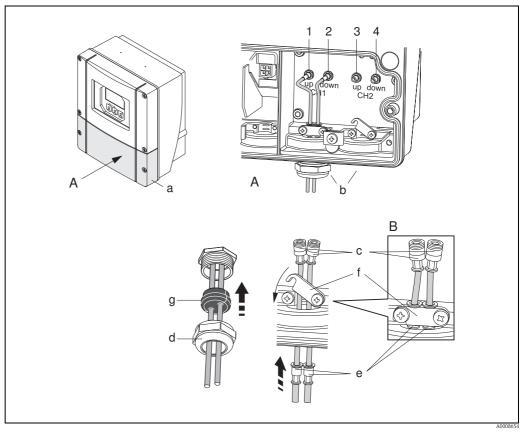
Connecting the connecting cable for sensor/transmitter (with cable gland for two connecting cables per cable entry)
